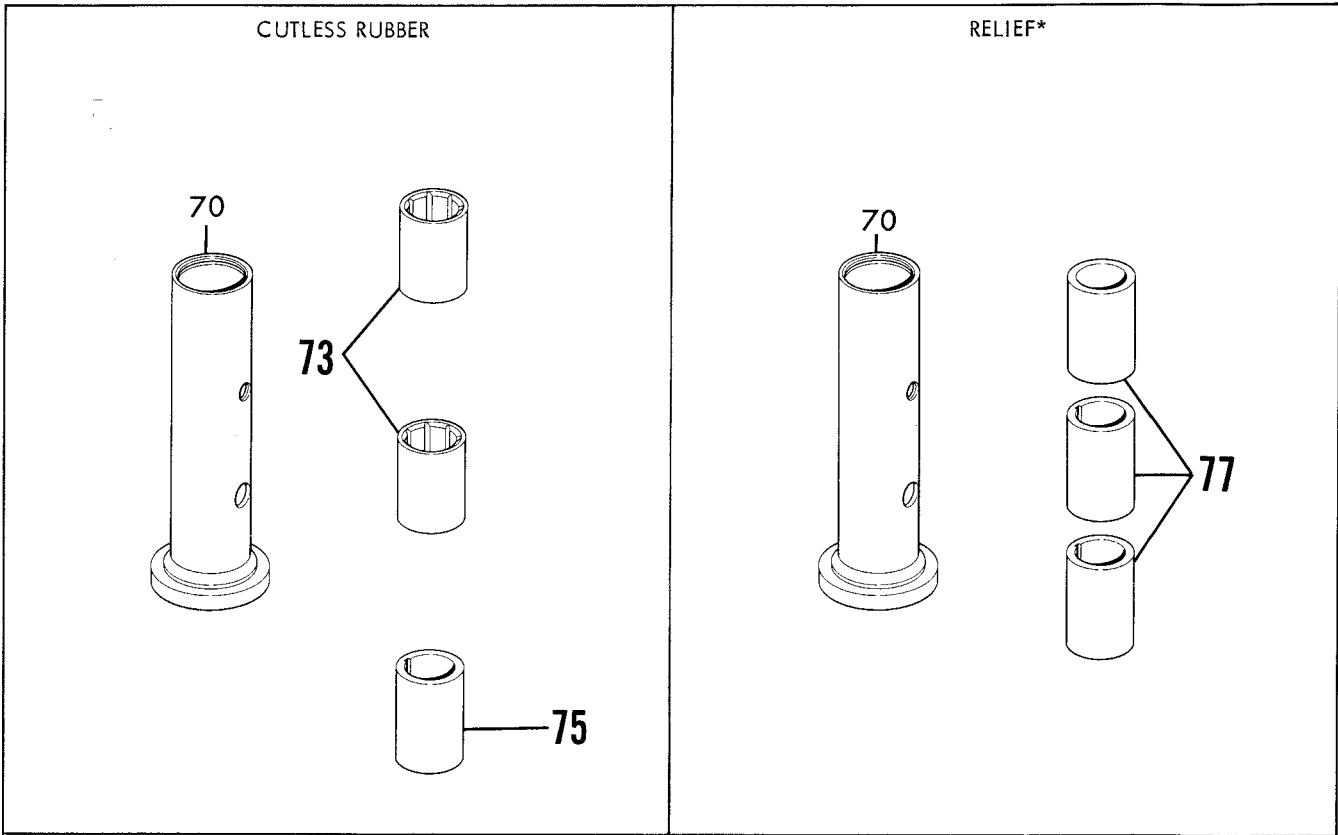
Model 631-632 Exploded View (Sheet 2 of 3)
